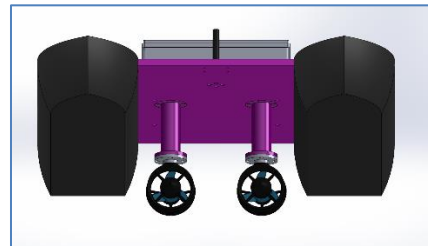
Finalized CAD model of bridge, motor mounts and hull design.
